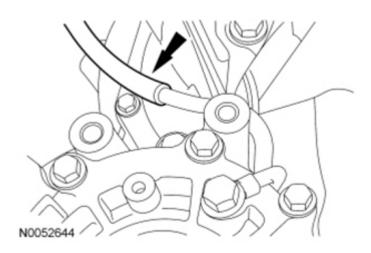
Locating PTU Vent Hose Courtesy of FORD MOTOR CO.
